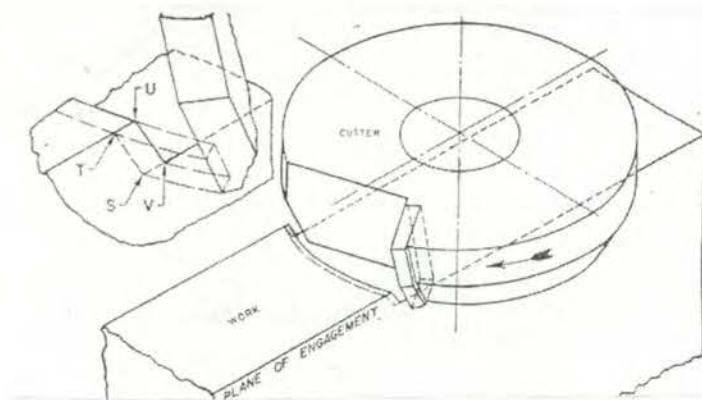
Definition of the initial contact of face milling cutter with the workpiece [19]
